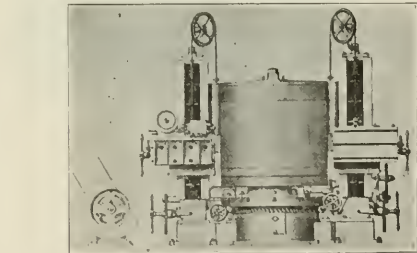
LATHE FOR UNWINDING COPPER STRIP.
